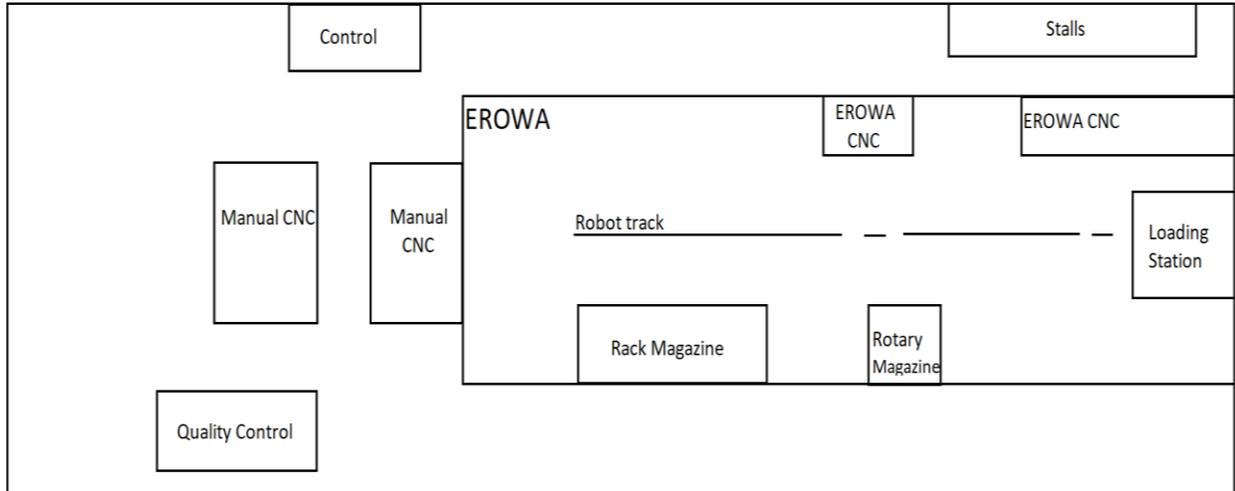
SPM Automation Inc. Facility Floor Plan and the EROWA automated manufacturing system.
